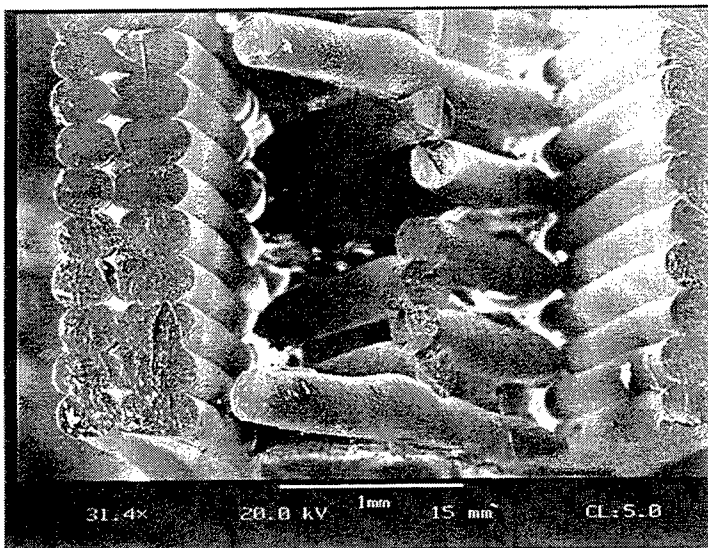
Fracture surface of Clear impregnated sample at 0.05" gap and 31.4X.
